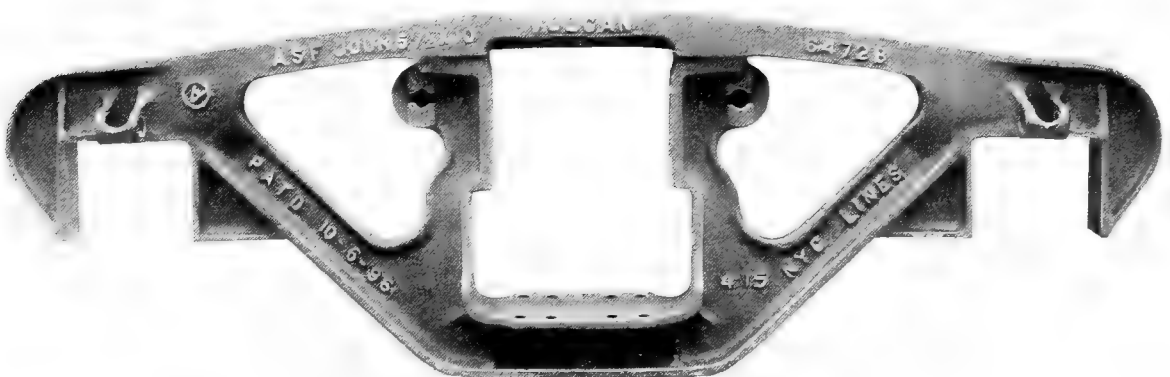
Vulcan Cast Steel Truck Side Frame. American Steel Foundries
